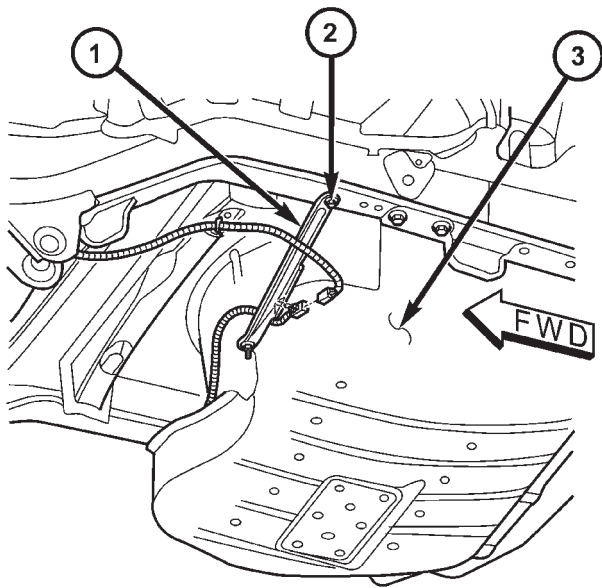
FUEL TANK HEAT SHIELD BOLTS
